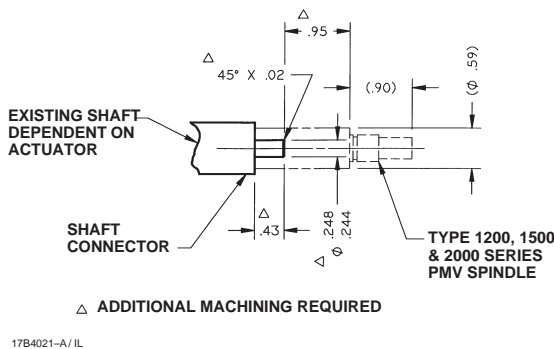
PMV Spindle Dimensions Required to Fit Coupler (key 180)
